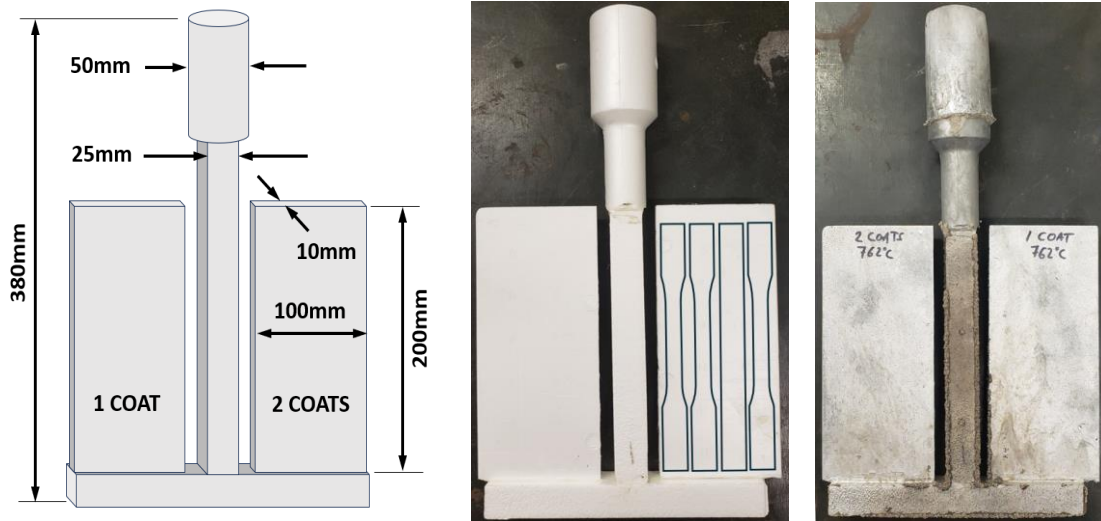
LFC process for EPS pattern with bottom-up filling orientation: pattern dimensions (Left), EPS pattern assembly showing arrangement of tensile and microscopy samples (Center), and A356.2 alloy casting (Right), poured at 750 °C.
